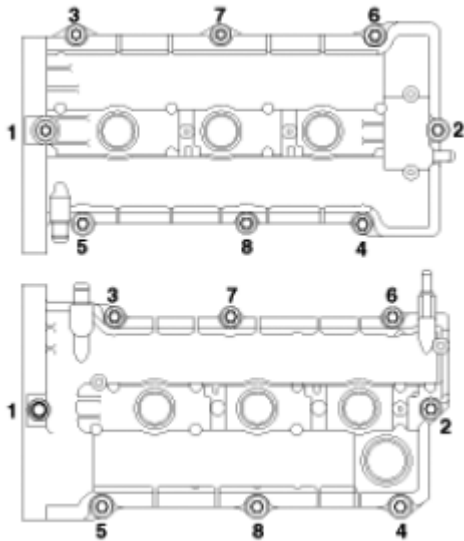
Cylinder Head Cover Bolts Tightening Pattern
